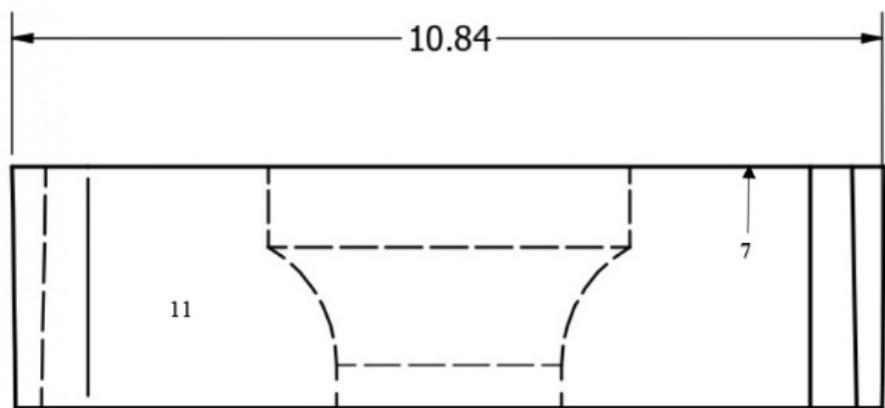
Top view of the machined stainless steel 316 grade insert
